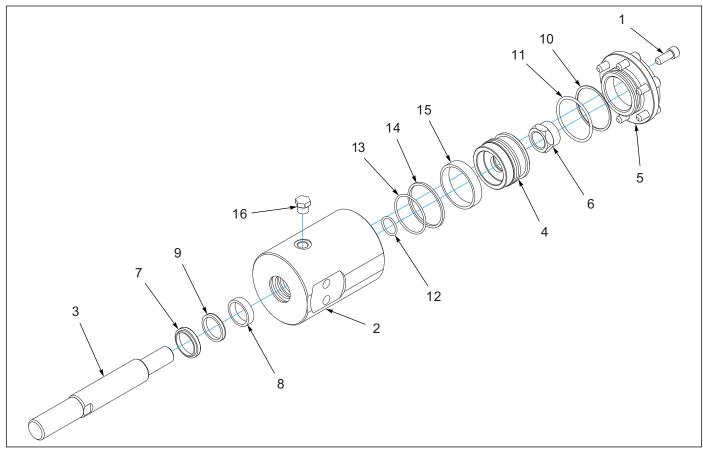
Cylinder Assembly 2-1/2 x 1-1/2
